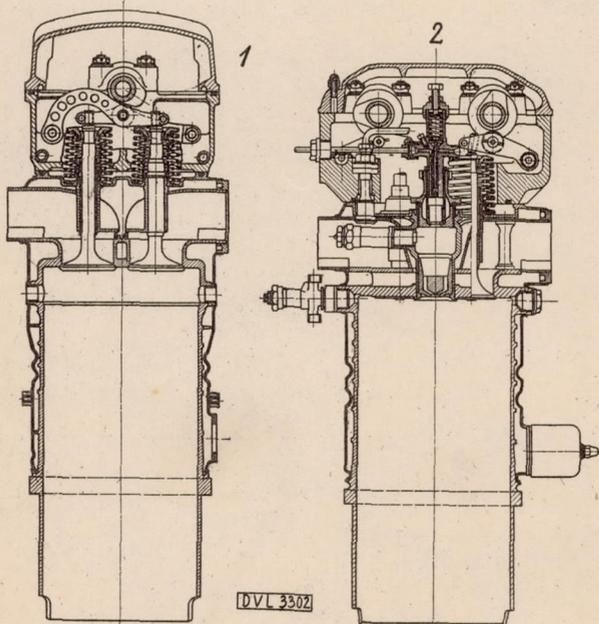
Cylinder designs for carburetor engine and for Diesel aircraft engine.
